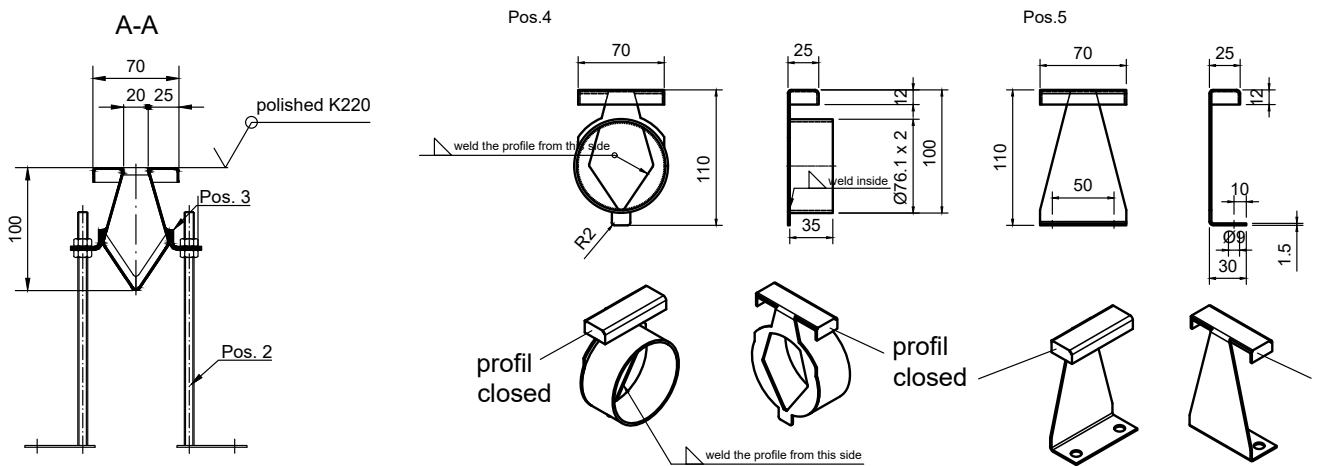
Drawing with improvement (welding explanation) (Source: Own drawing)
